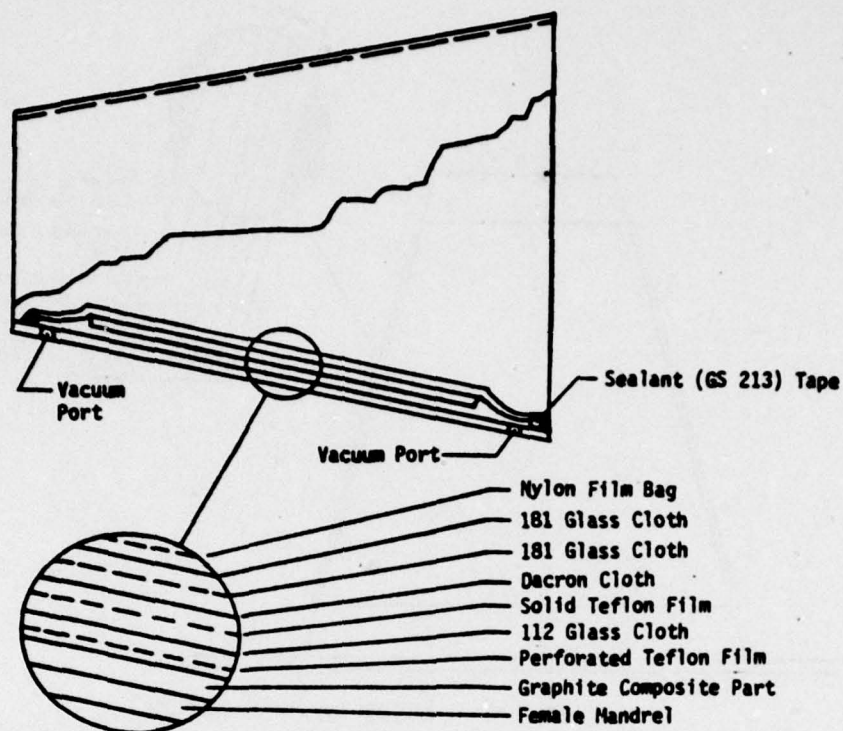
Bleeder/Breather Assembly on Female Mandrel
